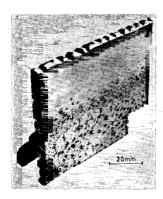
Section of a vessel made of CrNiMo steel 1.4571 with a steam jacket welded onto the outside; SCC in the welding zone.
